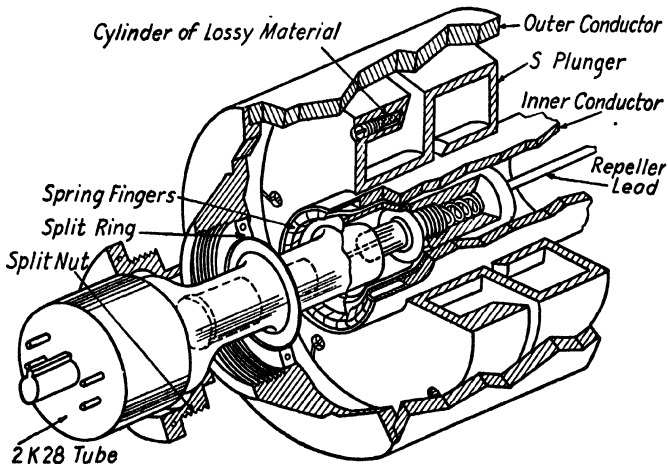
Method of fastening 2K28 tube flanges in outer and inner conductors of a large coaxial resonator.
